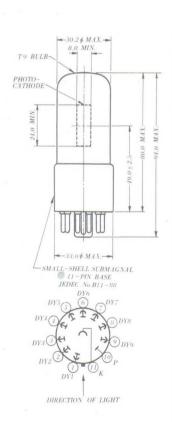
DIMENSIONAL OUTLINES AND BASING DIAGRAMS-DIMENSIONS IN MILLIMETER
